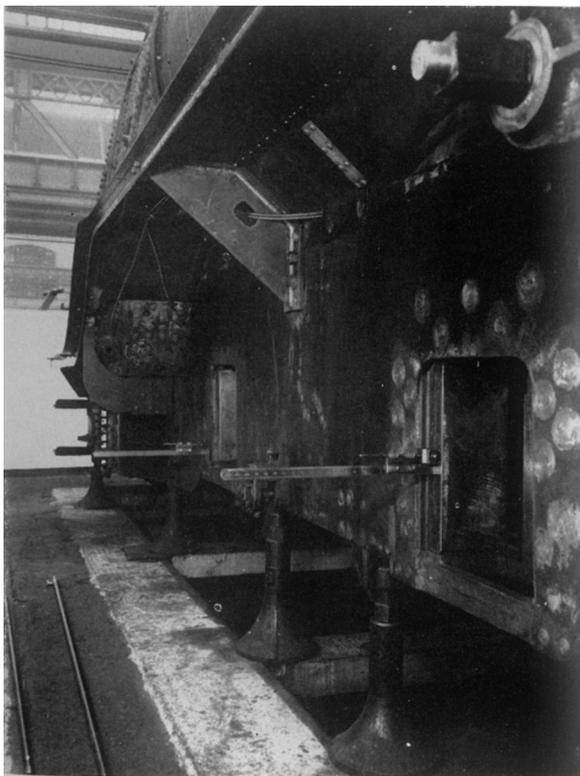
Application of magnetic blocks for holding steel rules to axlebox guide edges and frames.
